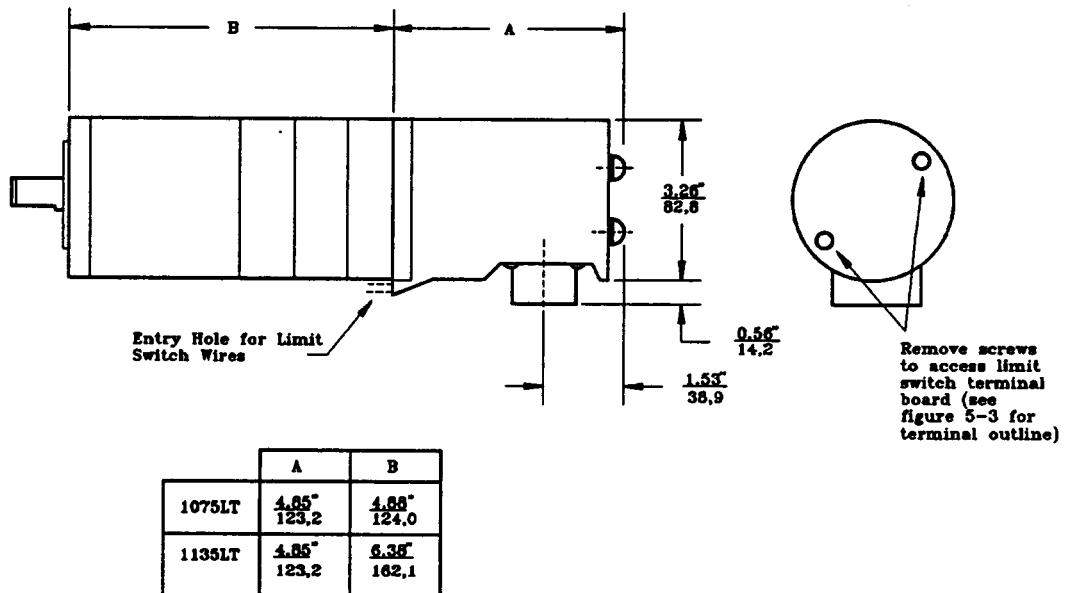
Mechanical Dimensions for Unidex 11 DC Motors
